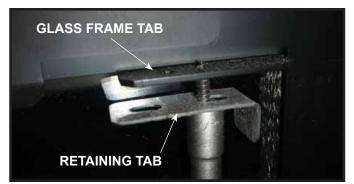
Attaching Retaining Tab to Glass Frame Tab.
